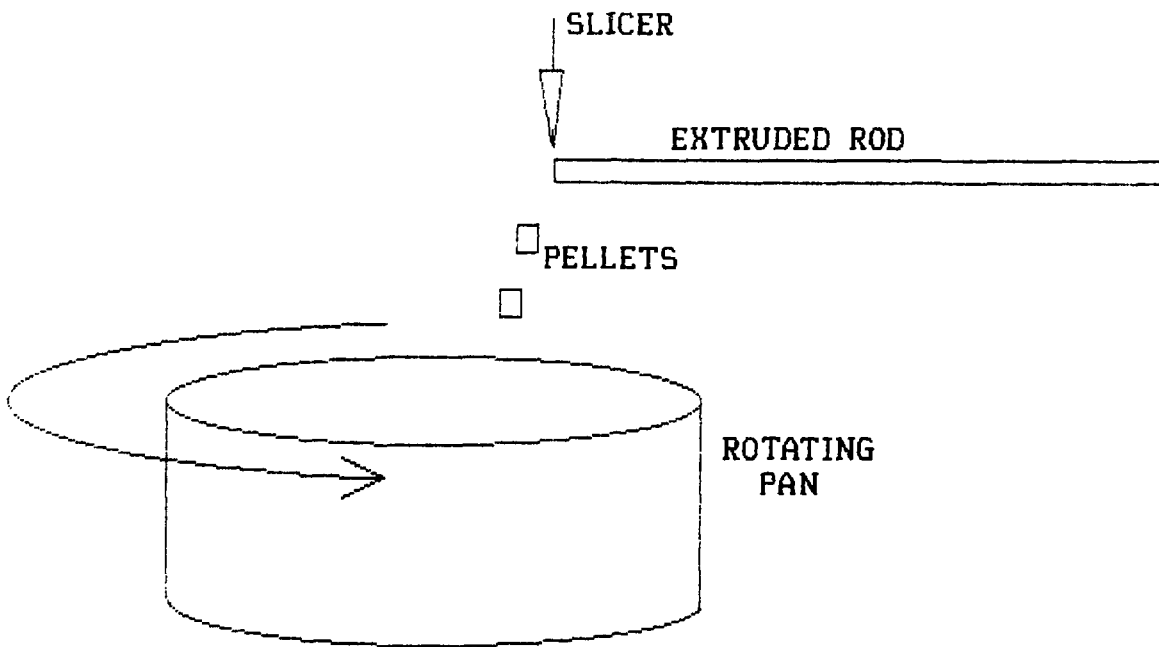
Forming spheres from extruded rod in a rotating pan.
